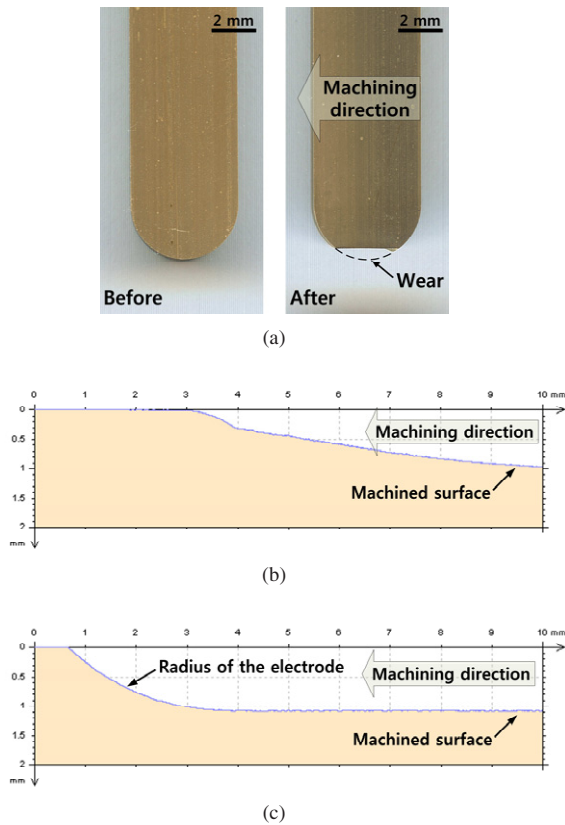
(a) The block electrode before and after machining; (b) The profile of the machined surface using a block electrode; (c) The profile of the machined surface using a strip electrode.
